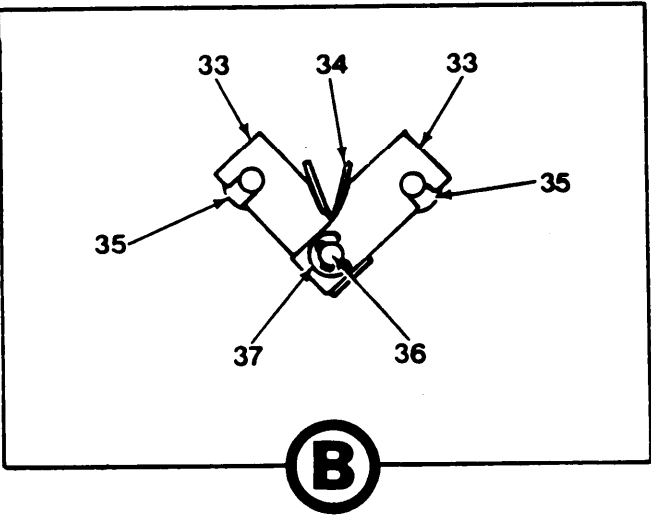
Switch and Drum Assembly (Sheet 1 of 4).
